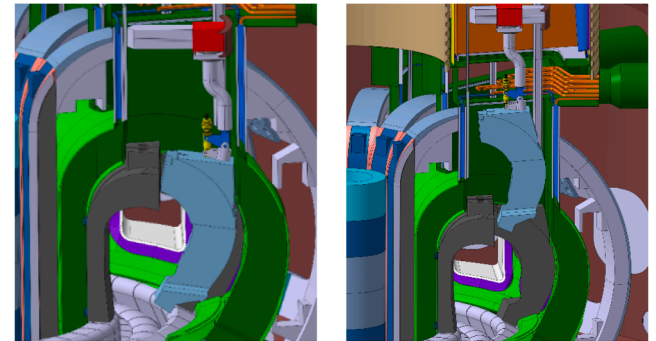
Left: Blanket segment tilting and extraction; Right: Blanket segment lifting.
